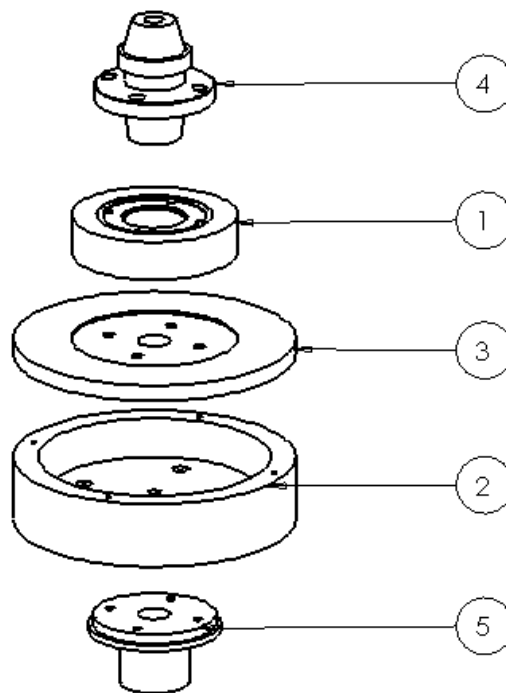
Exploded view showing all die components used in the centrifugal casting trials
